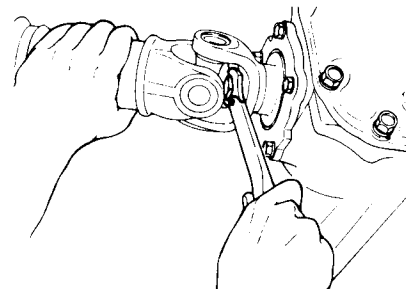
Tightening Side Yoke Fixing Bolt
